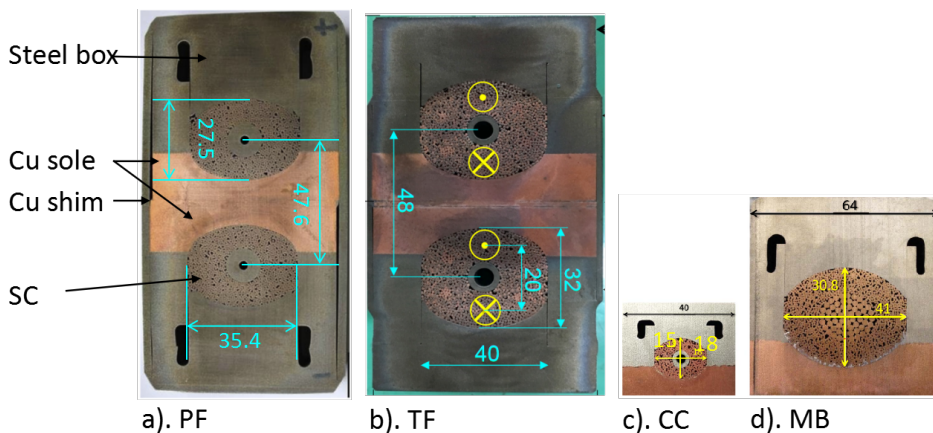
Family of twin box joints: a) PF6 joint by ASIPP, b) TF joint by NIFS (similar design with the CS lead joint), half joint box of c) CC and d) MB conductors. The copper copper shim in between the joint boxes is to mitigate assembly tolerances [46]–[48].
